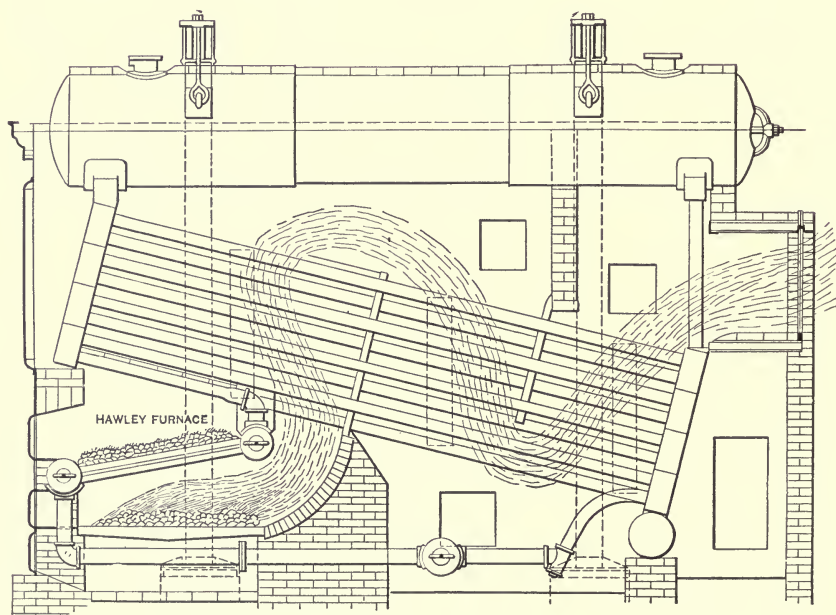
Water tube boiler equipped with Hawley down-draft furnace.
